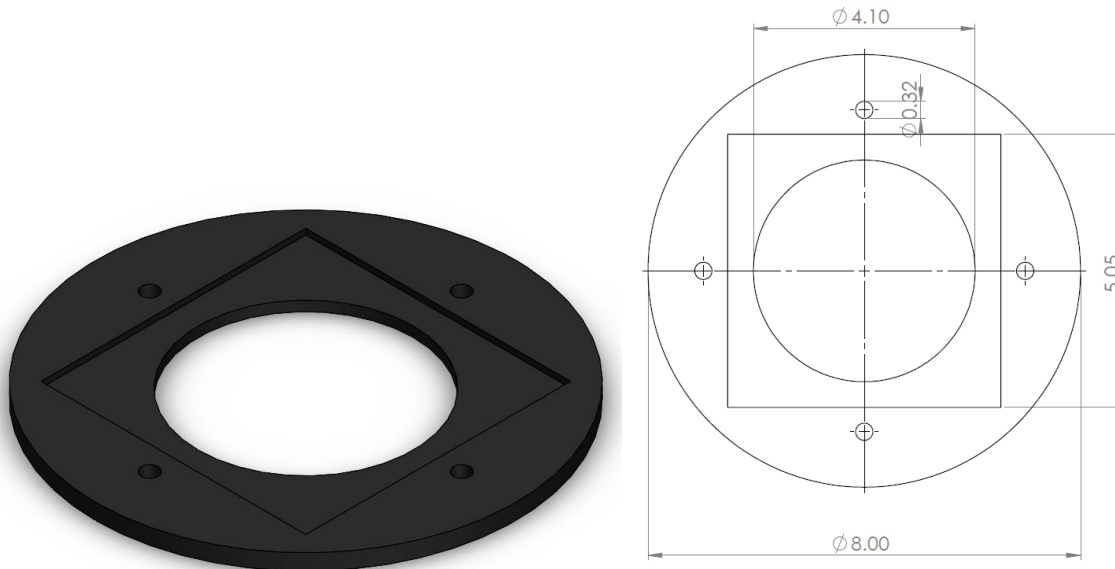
CAD drawing of the lens holder, commonly called the photon sieve holder with and without dimensions. Dimensions are in inches (Multiple the length value by 25.4 for millimeter dimension).
